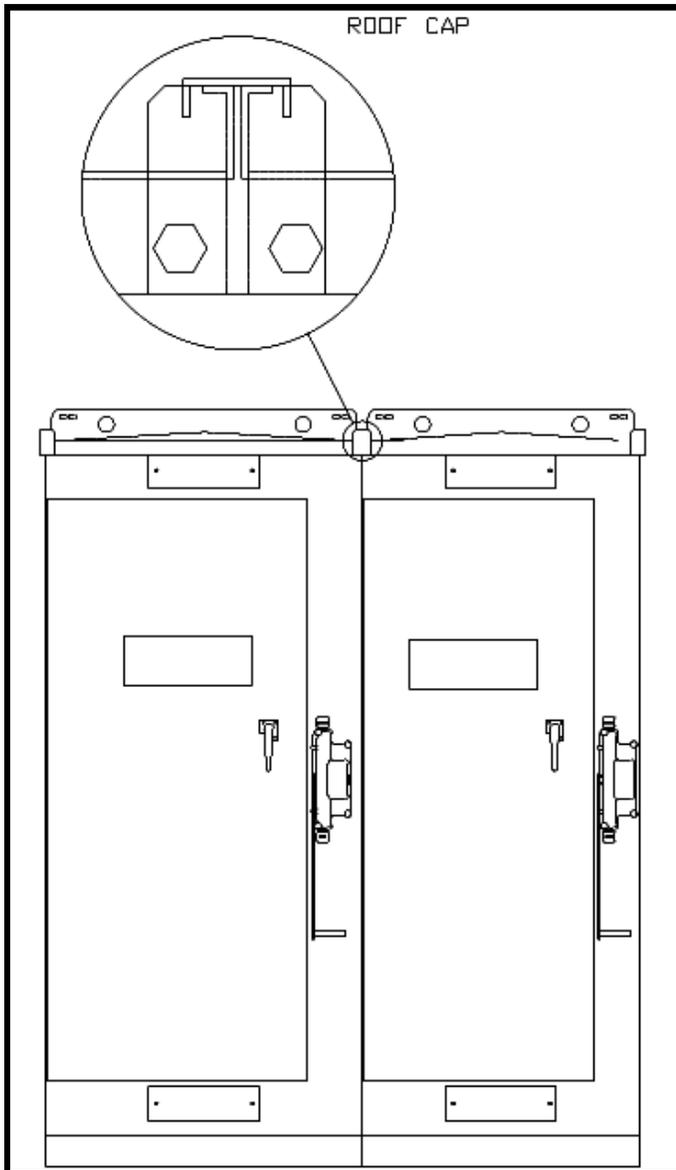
Outdoor Roof Construction with gasket between roof and enclosure flanges.
